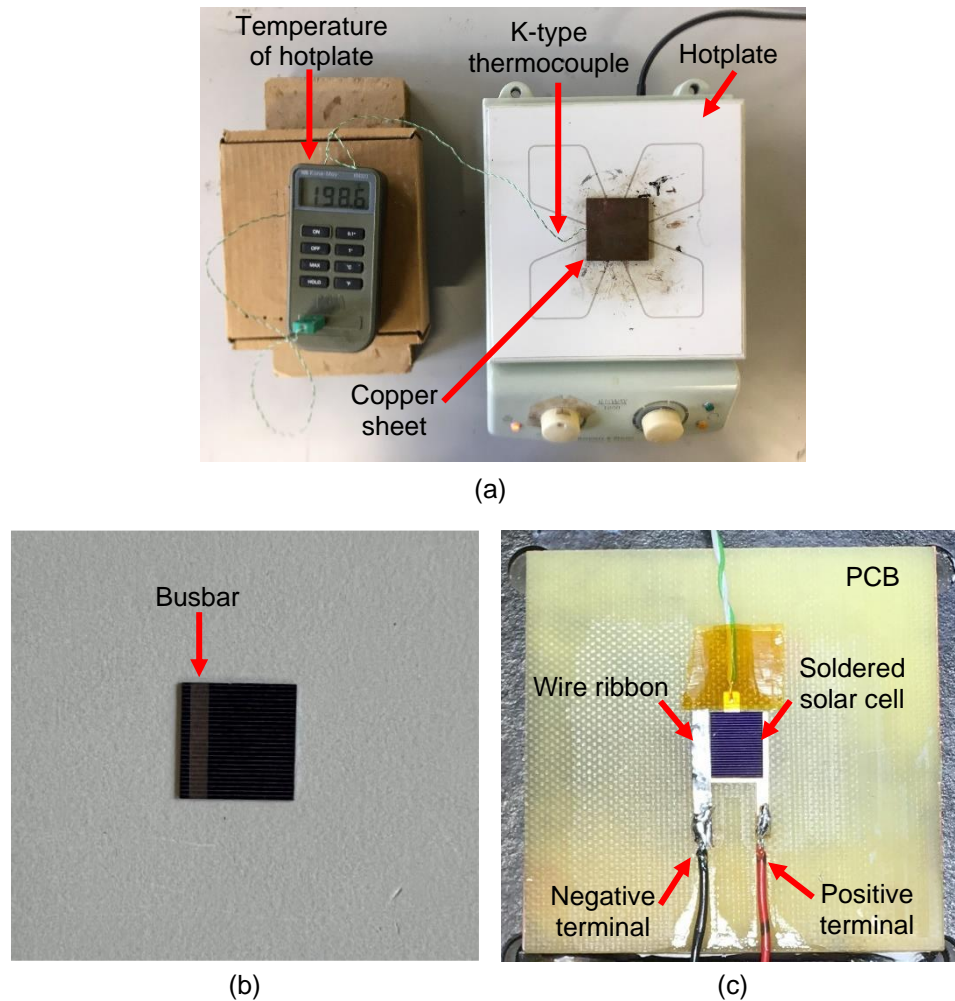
Soldering process of the solar cell: (a) the heated hotplate used for solar cell and PCB soldering and its temperature measurement using a K-type thermocouple, (b) the solar cell with a total area of 1 cm^2 ($1 \text{ cm} \times 1 \text{ cm}$) without contacts and (c) the solar cell after soldering the PCB and terminals resulting in an active area of 0.78 cm^2 ($1 \text{ cm} \times 0.78 \text{ cm}$).
